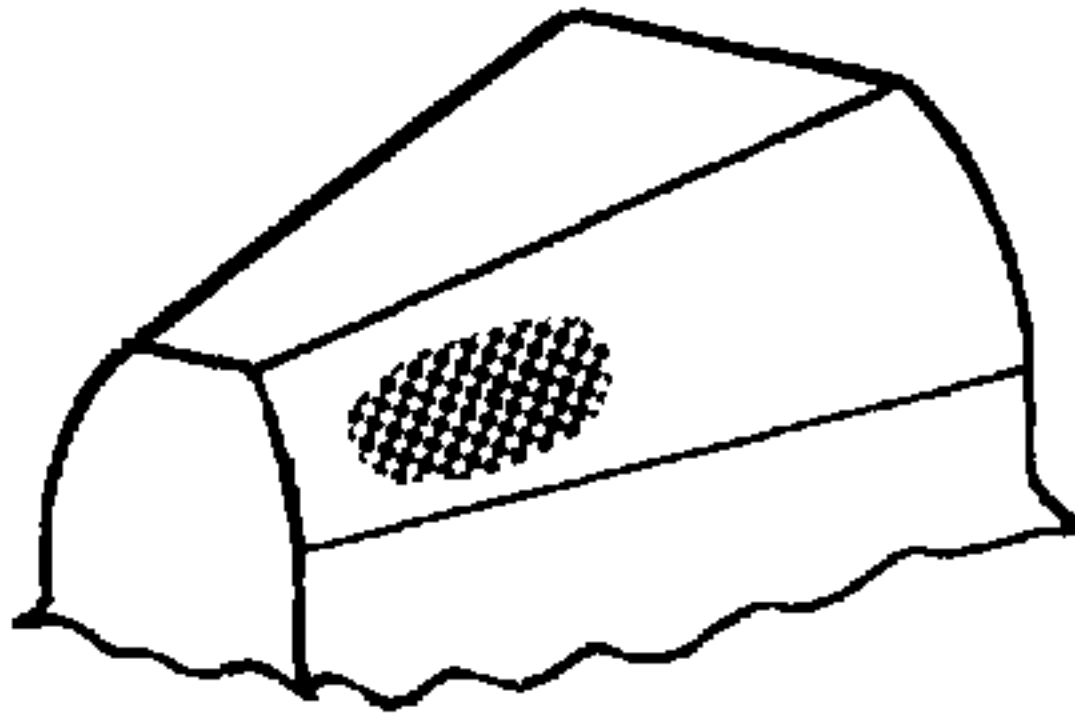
D. Ideal Ring Gear Tooth Contact Pattern.
